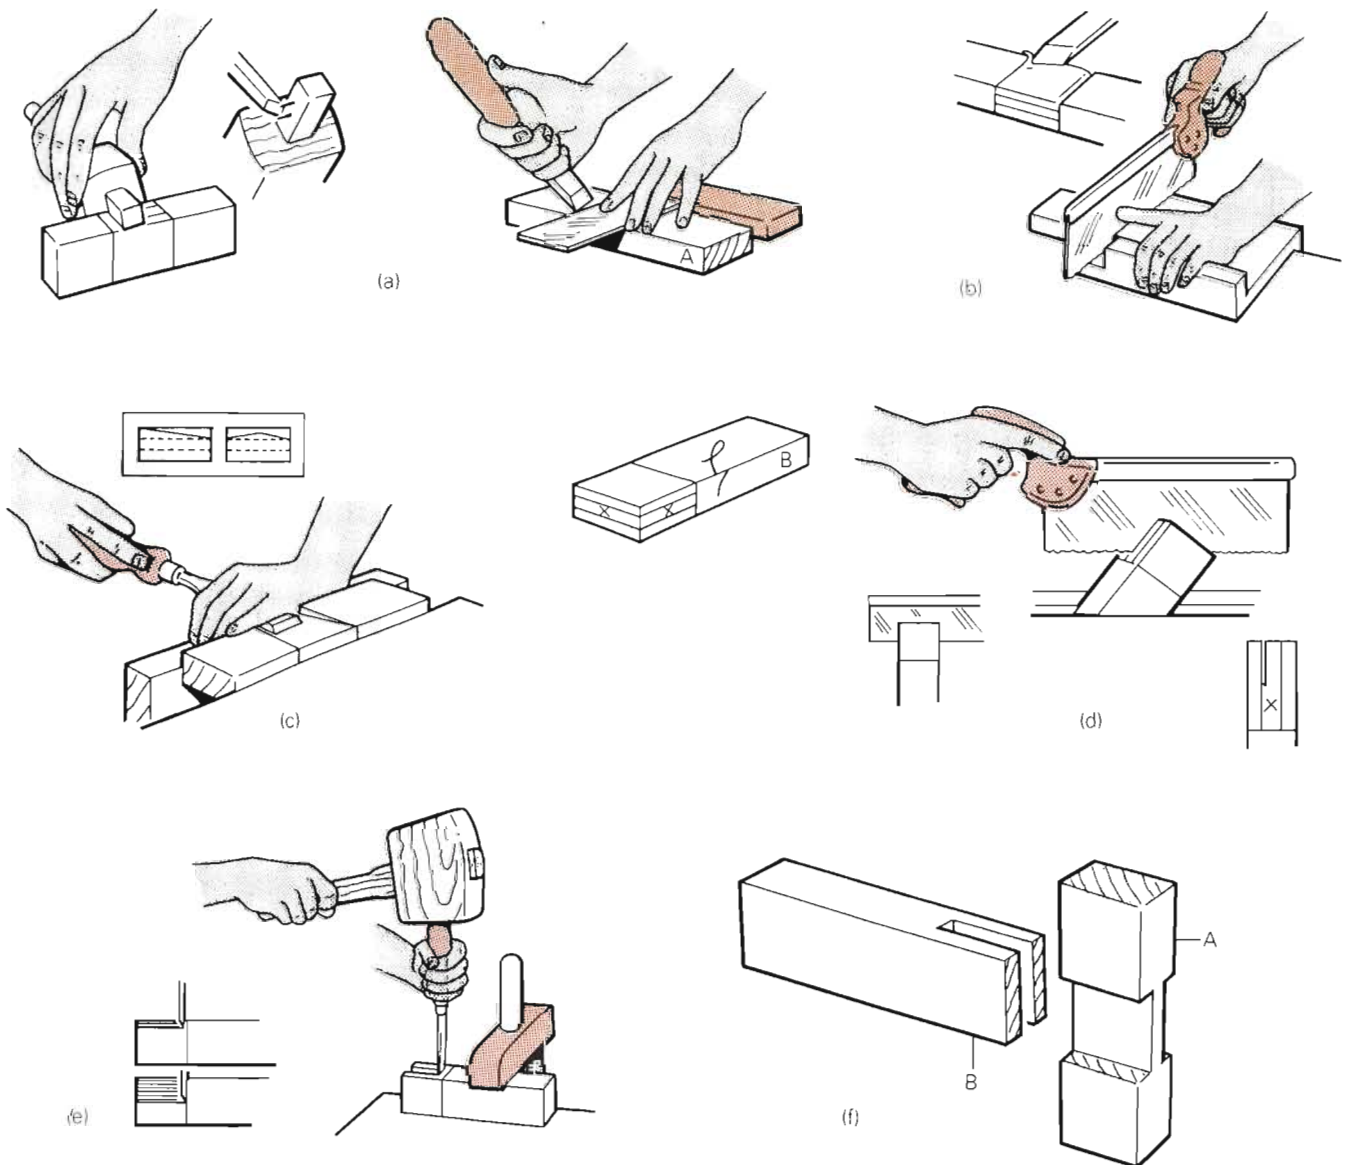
Preparing a bridled joint: (a) markout the tenon, (b) out the sides, (c) remove the waste, (d) cut the open mortise, (e) chop out waste, (f) assemble joint.
